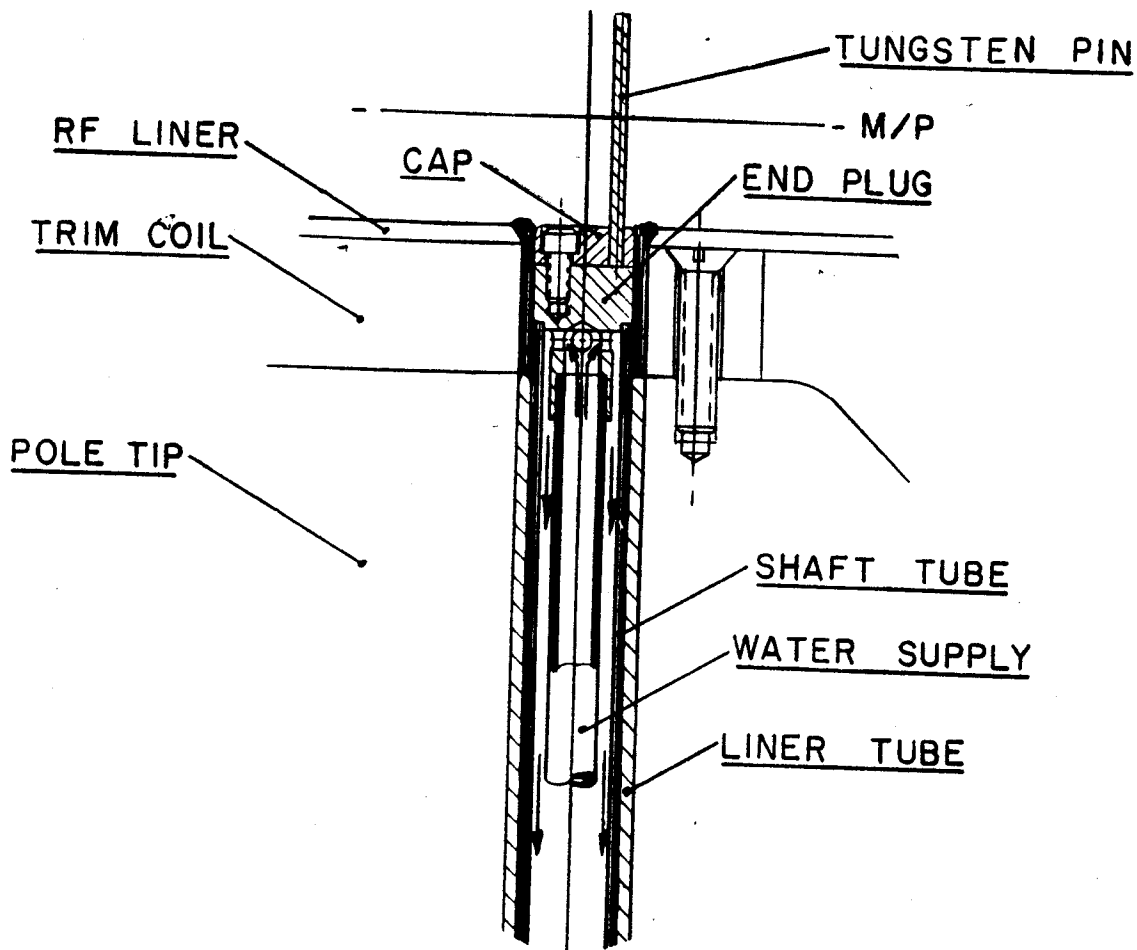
The end of the shaft at the median plane of the cyclotron. The sixty-two mil tungsten pin intercepts the unwanted beam. The pin is mounted in a copper cap which is easily removed for rapid pin change. Note: the copper end plug is water cooled so the tungsten will be indirectly cooled.
